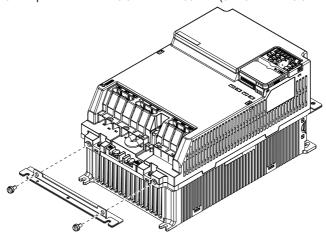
Install Bracket 2 (Bottom of the Drive)
